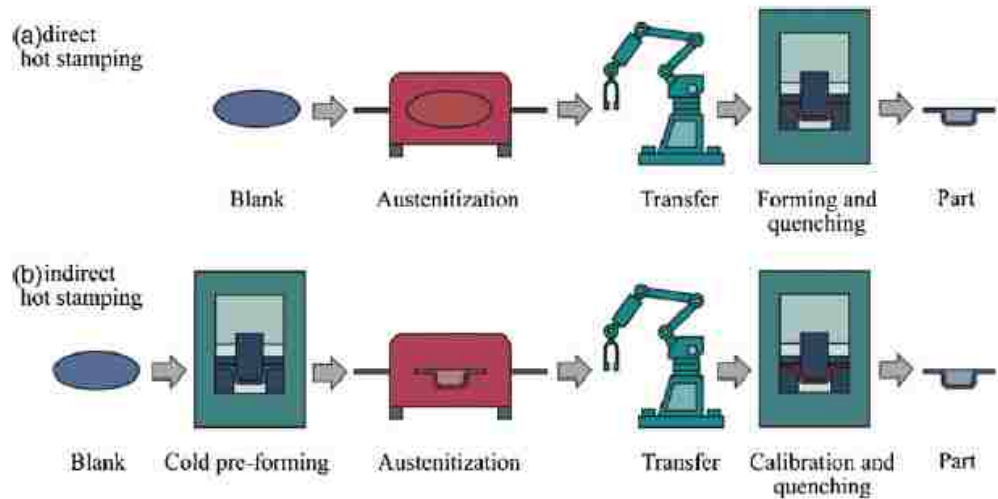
Basic hot stamping process illustration: (a) direct hot stamping, (b) indirect hot stamping [56].
